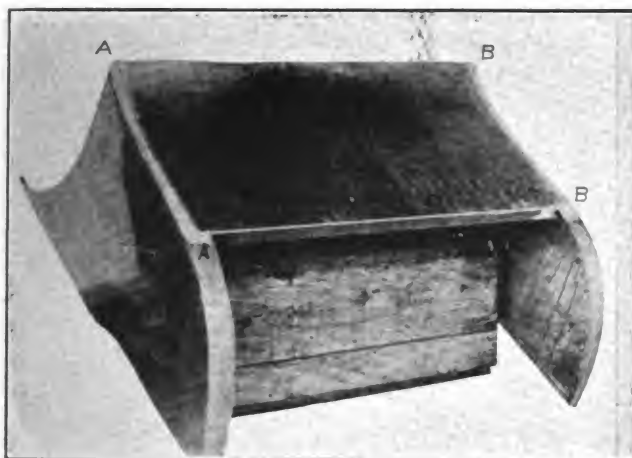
Rear boot of Franklin roadster welded at A and B in seven minutes
